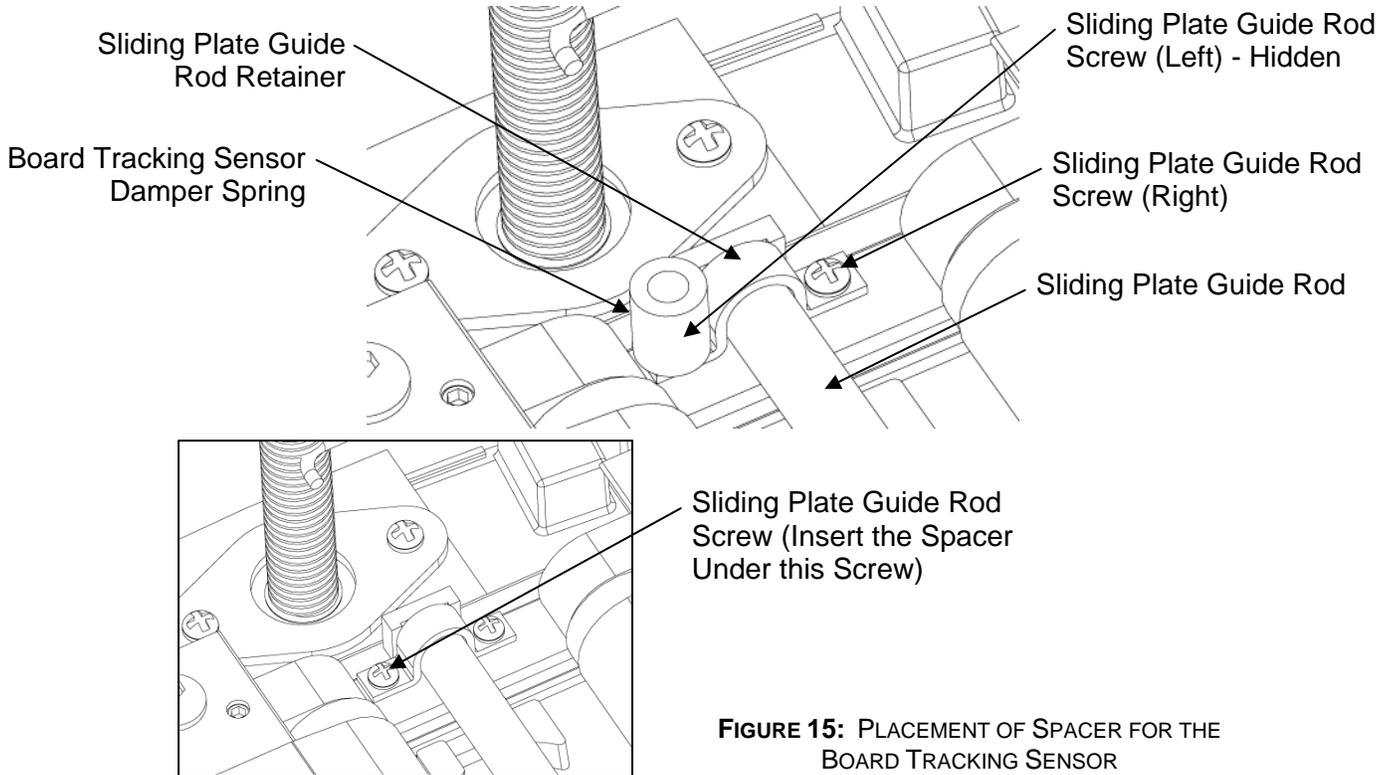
PLACEMENT OF SPACER FOR THE BOARD TRACKING SENSOR
